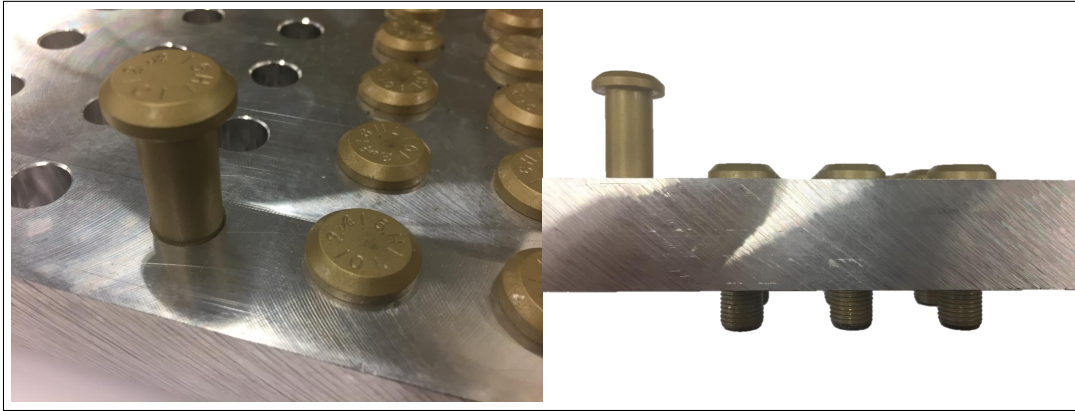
Displays the 12.675 mm bolts in a coupon with 12.600 mm interference fit holes, with a top view (left) illustrating the starting position for a bolt, and the fully seated position (right) with the threads present on the back side of the coupon.
